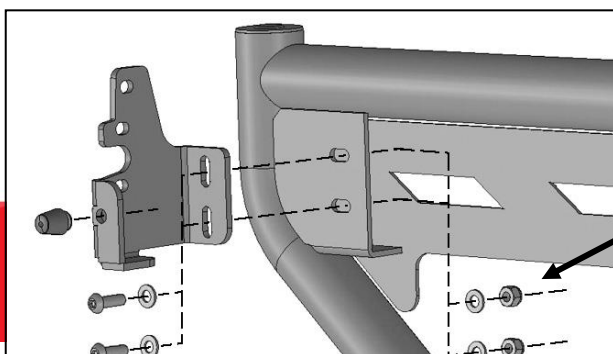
Driver/left Upper Mounting Bracket attached to back of Door
